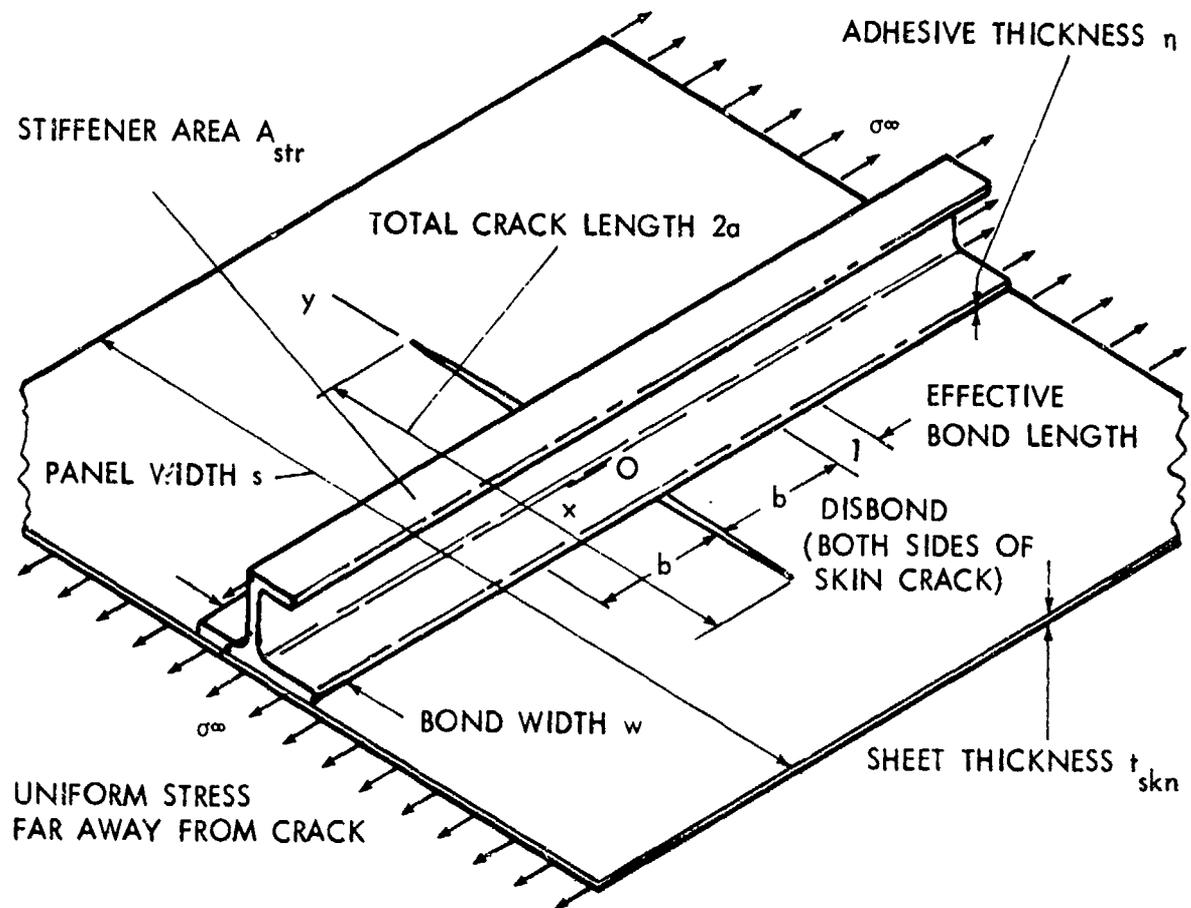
TWO-BAY SHEET CRACK RESTRAINED BY BONDED CENTRAL STIFFENER
